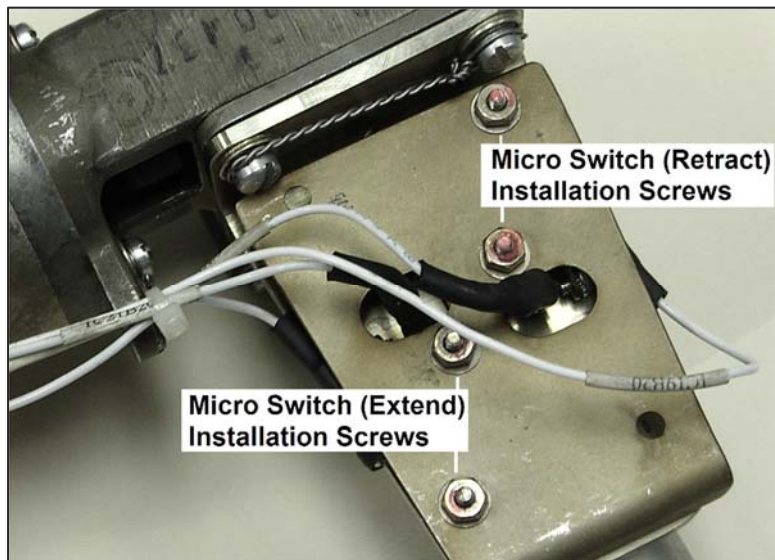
Switch Plate Assembly Micro Switch Screws (trim actuator assembly removed for clarity)
